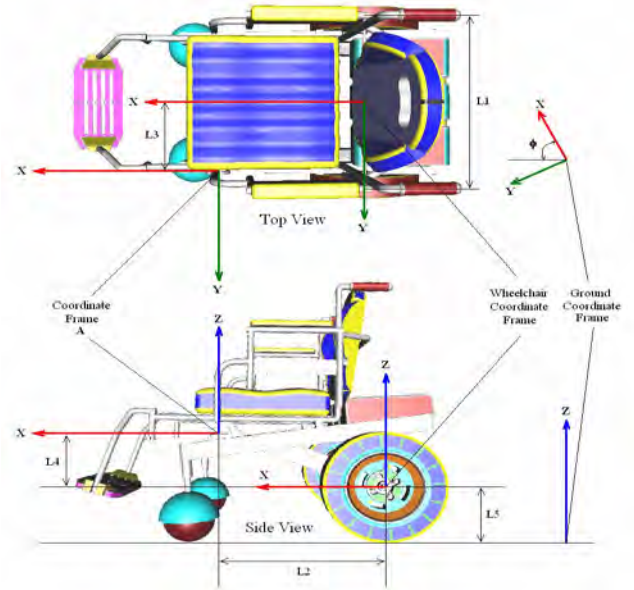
Mobile platform coordinate frames and dimensions of interest.
